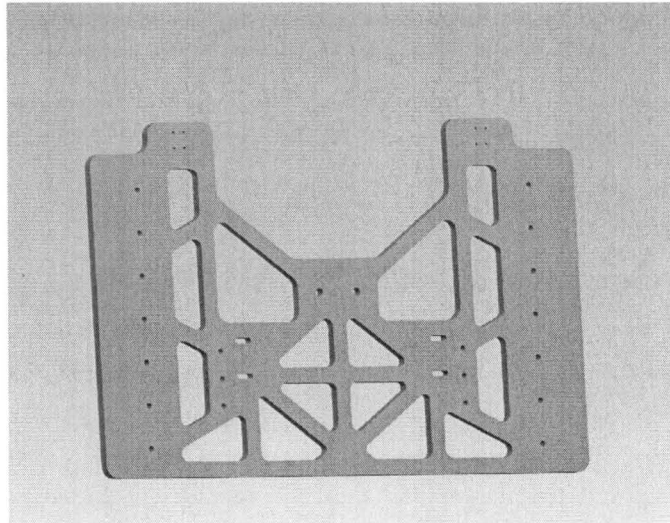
Pro-E Model of Stationary Back Mounting Plate
